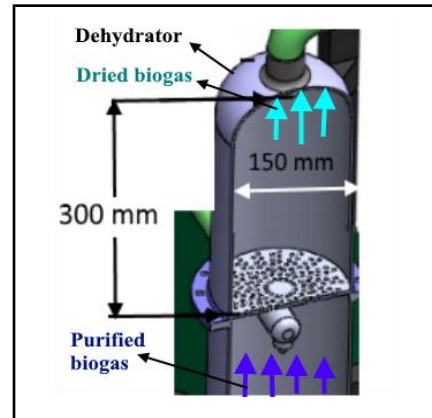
Schematic 3D drawing of the biogas dehydrator, all dimensions in mm
